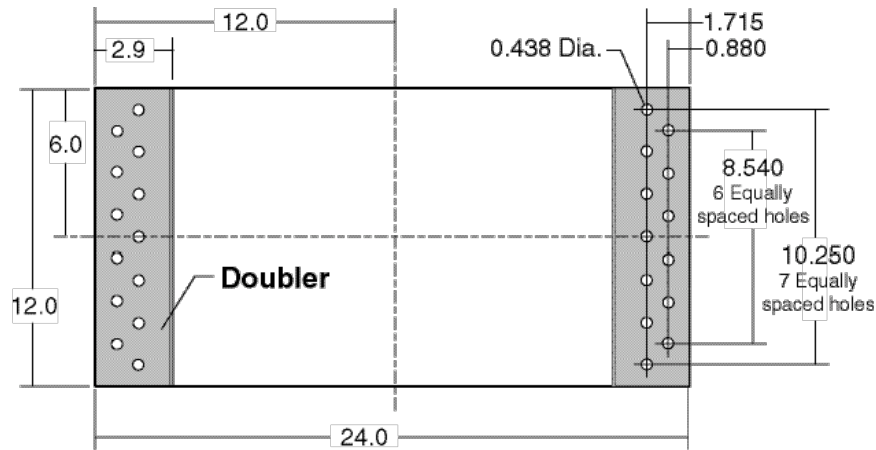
Schematic Drawing Illustrating Locations of Attachment Holes Machined into Metal Substrate (All Dimensions are in Inches)
